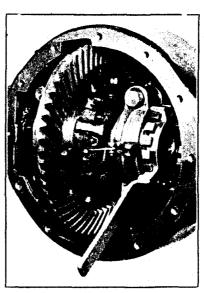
Gear Mount Adjusting Wrench 91671 for Ball Bearing Type Axle
